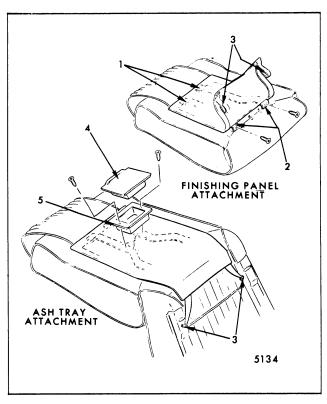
Salon Bucket Seat Back Ash Tray and Finishing Panel
